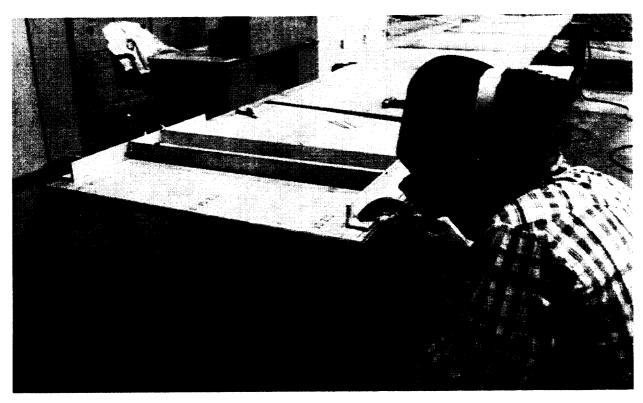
Welding Thin Sheet to Flat Plate To Make Flattening Retort
